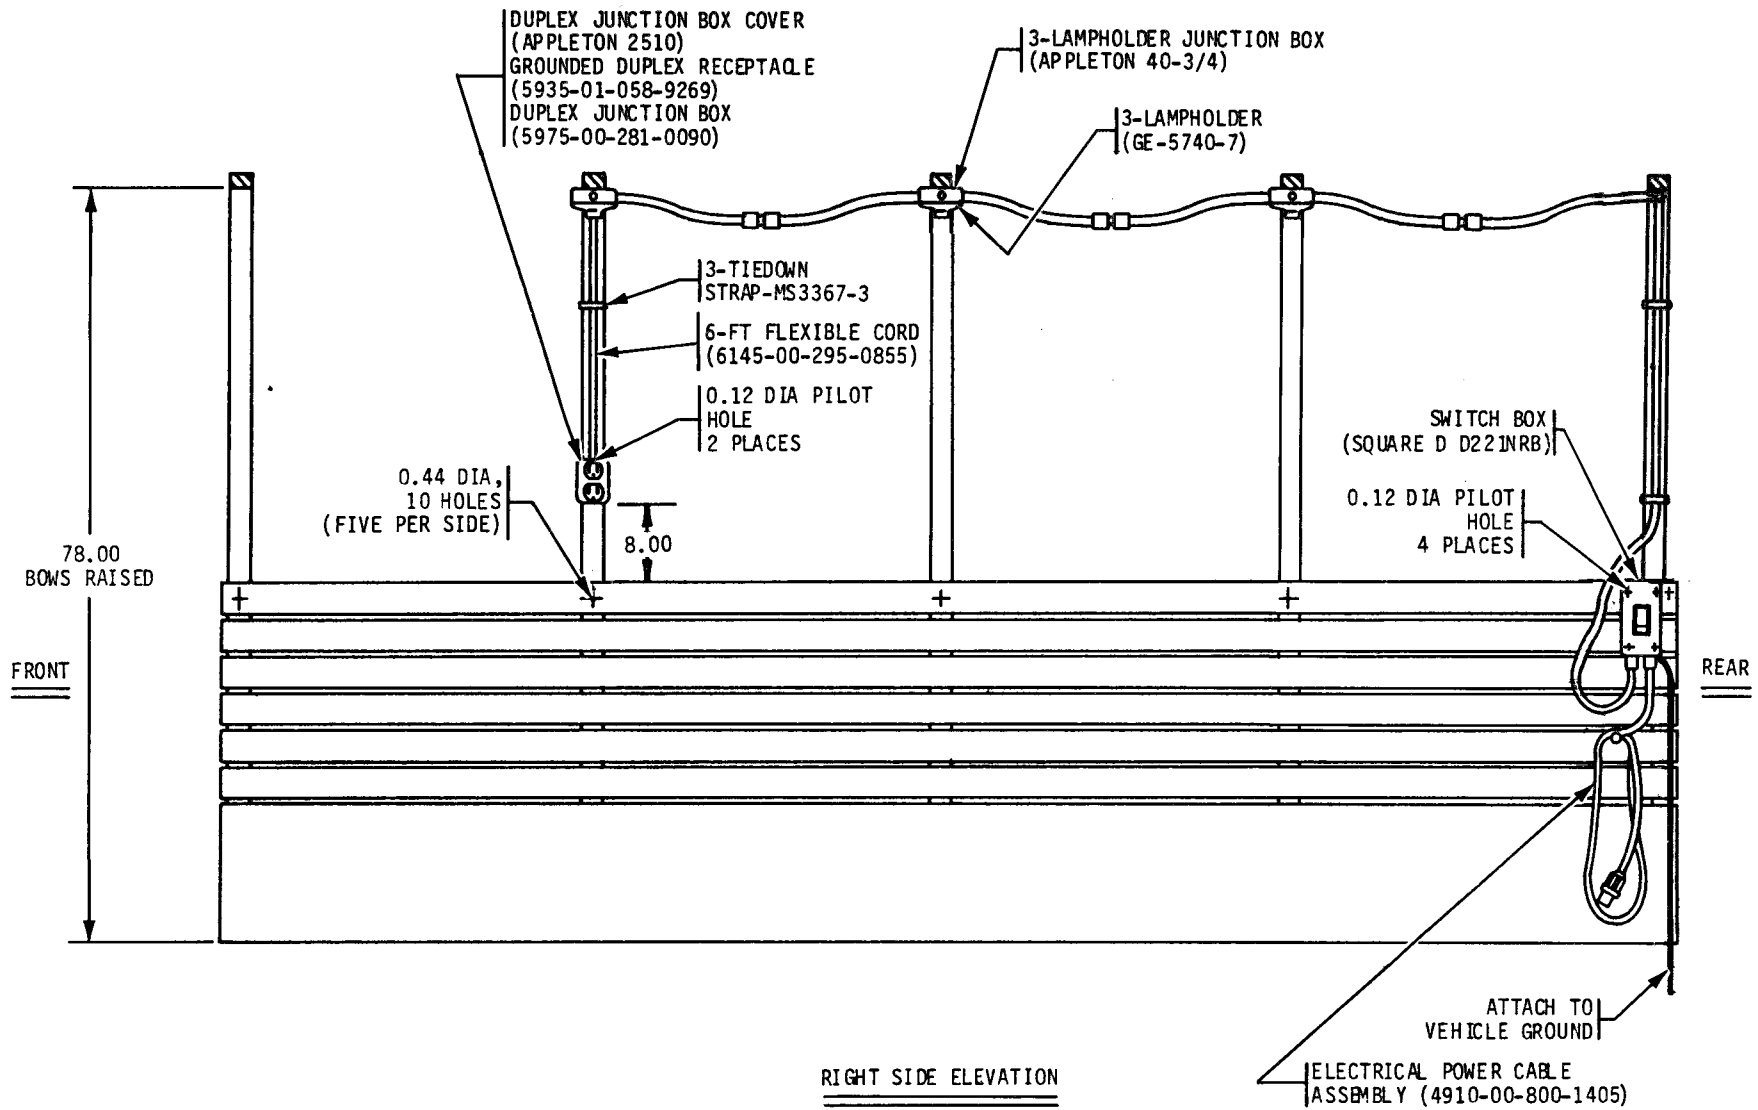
Electrical Components to be Mounted, M35A2, Right Side Elevation.
